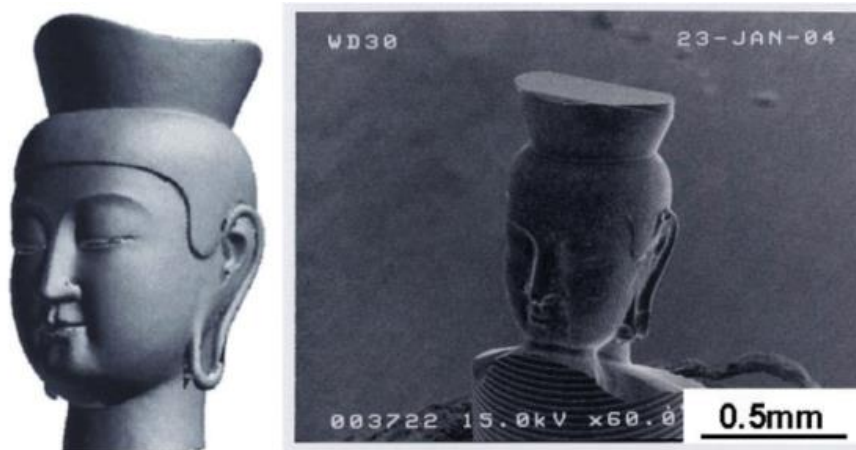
Micro Statue Machined with Ball End Micro Mill on 5 Axis CNC Machine Tool [10].
